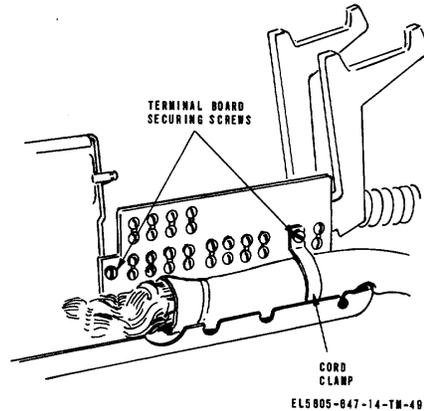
Express-Link-Local-Order Wire Unit TA-923/FSC, terminal board and line cord mountings
